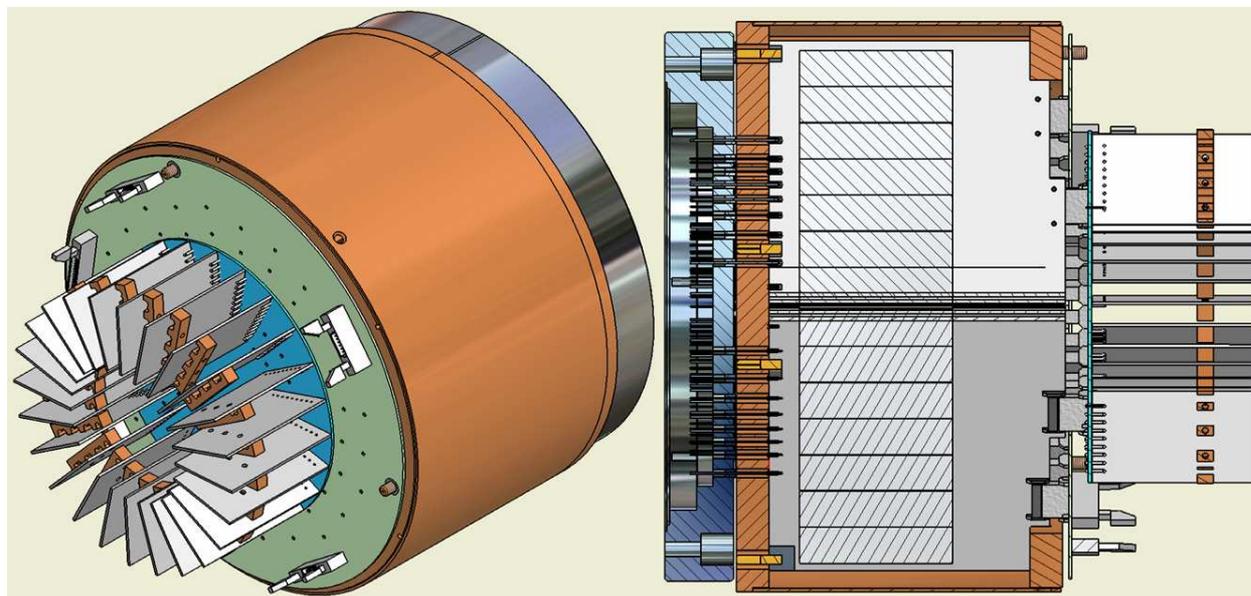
Focal Plane Detector System On the left side is an isometric view of the complete assembly as it will be installed. On the right side is a section through this assembly showing the individual components in more detail.
